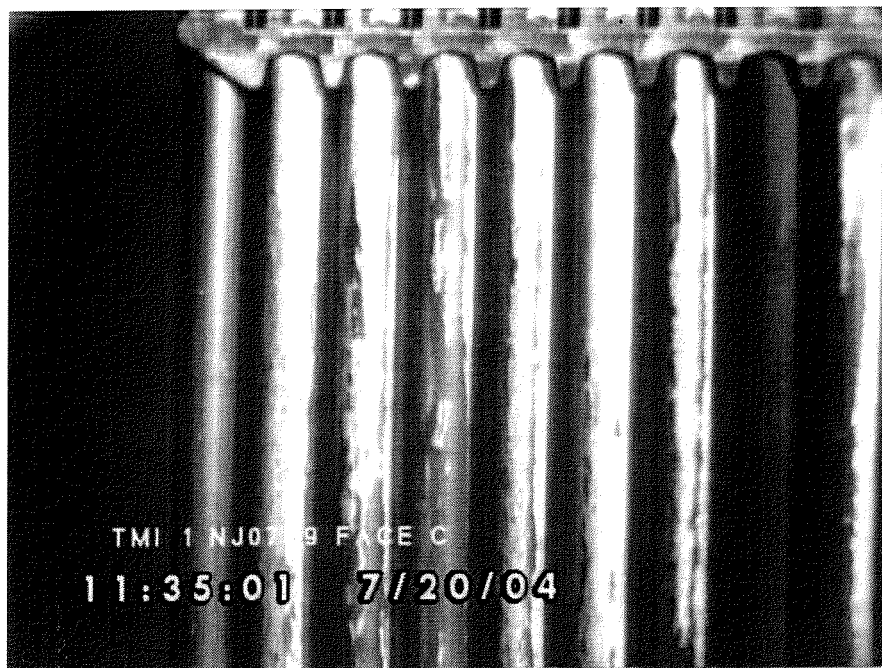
Photograph of Assembly NJ07U9 Sixth Grid Span
